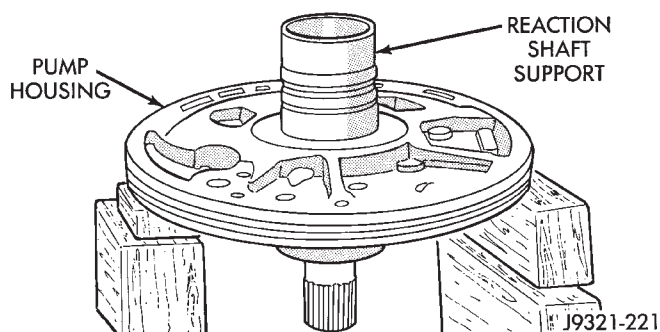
Assembling Reaction Shaft Support And Pump Housing
